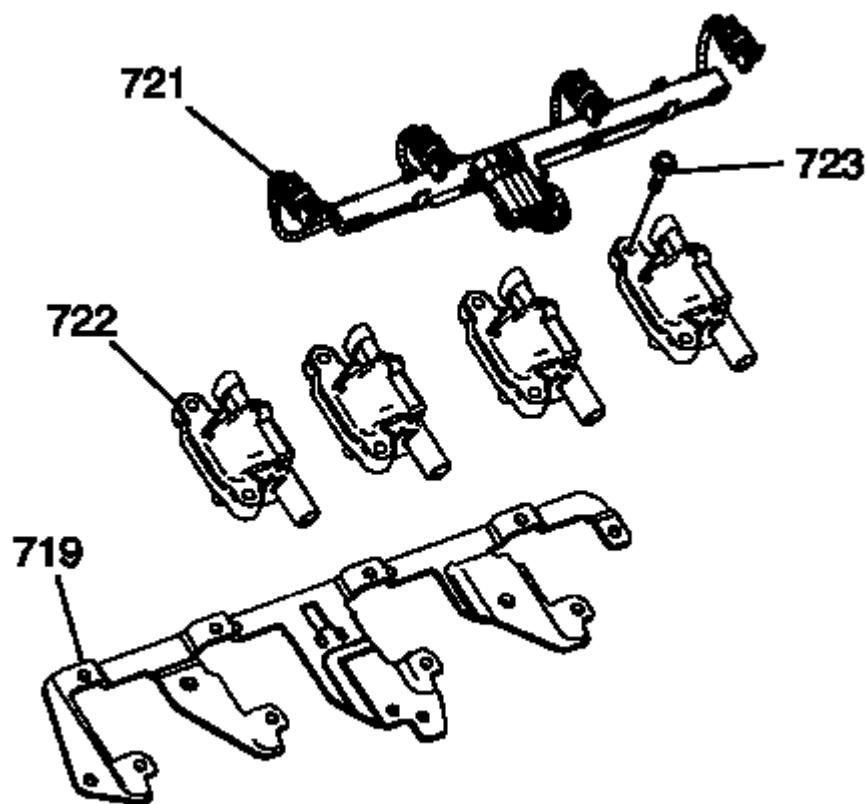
View Of Bracket, Bolts, Coils & Wire Harness
